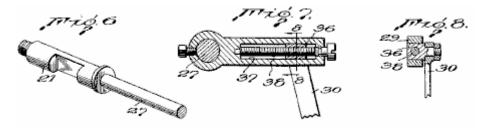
is a cross-sectional view showing means for adjusting the valves shown in Fig.5
